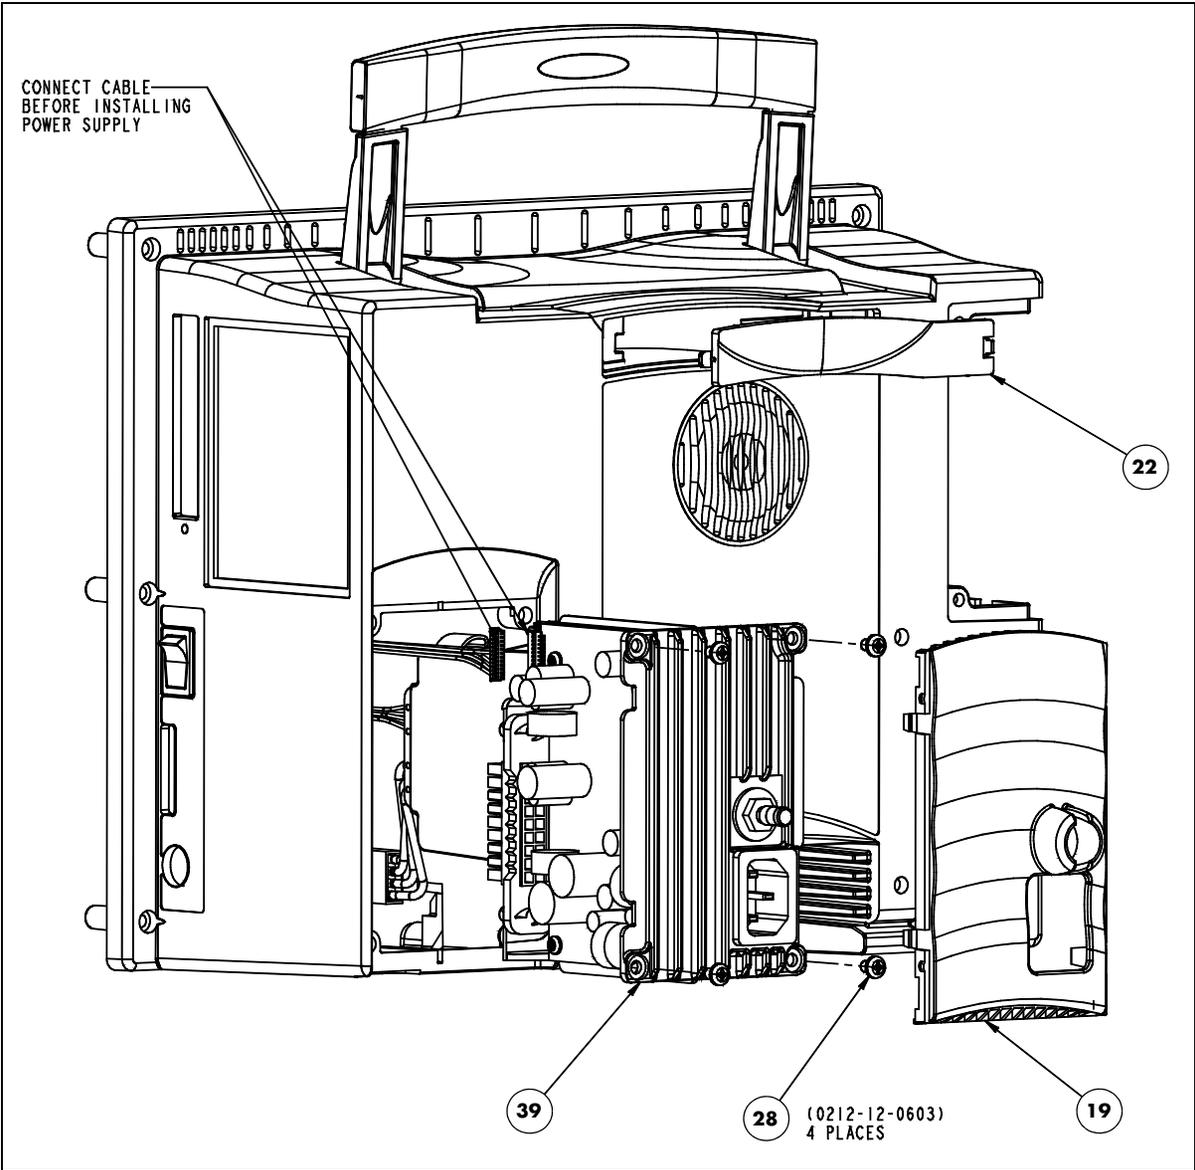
Rear Housing Assembly (Lithium-Ion battery configuration)
